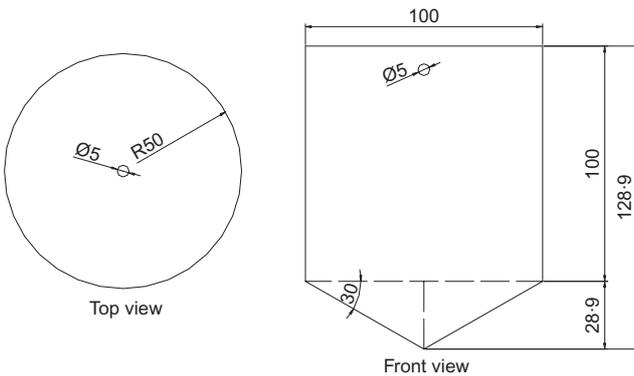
Conical-bottom tamper weight dimensions (units are mm)
